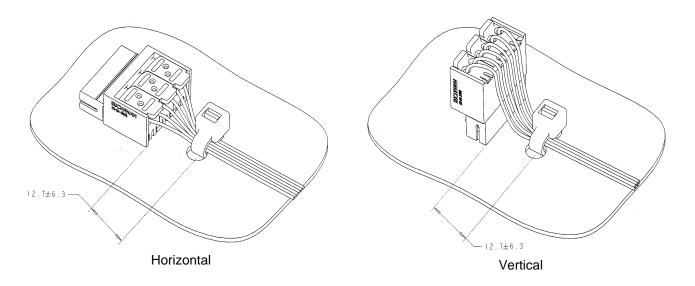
Vibration and Mechanical Shock Mounting Fixtures
